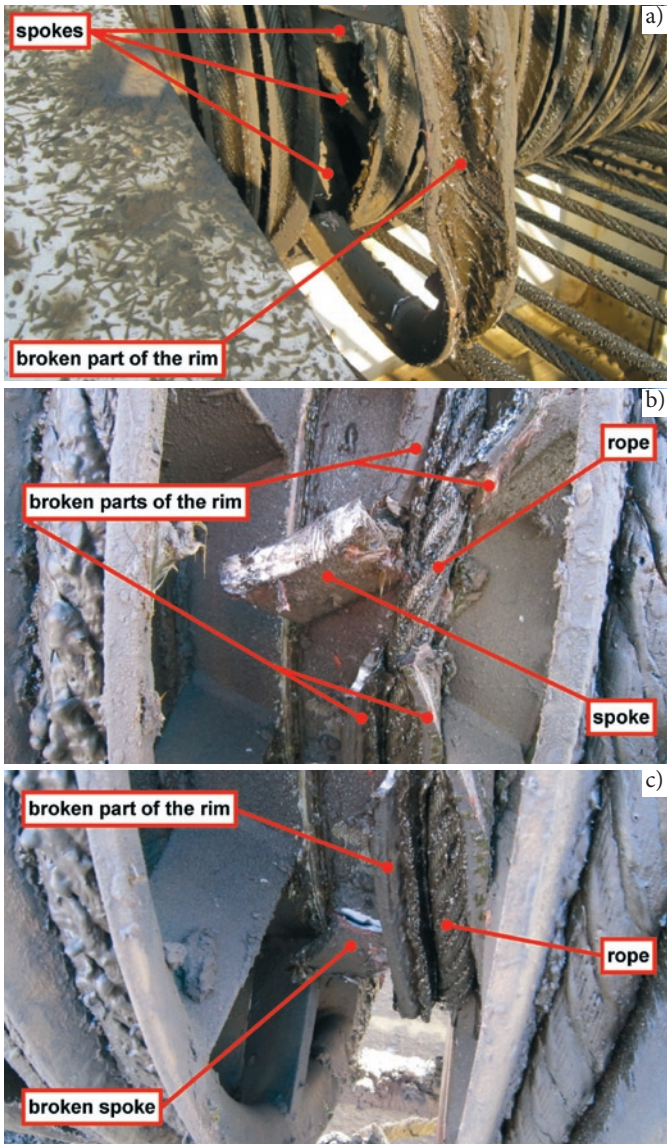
Details of the fractured pulley: (a) front view; (b) back view; (c) view from below
